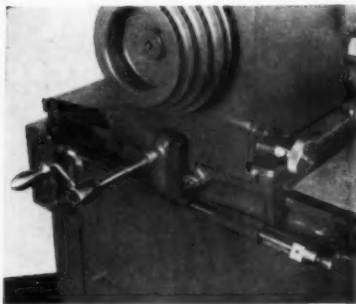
Rear View showing dogs for controlling traverse of bed and for operating micro-switches.
